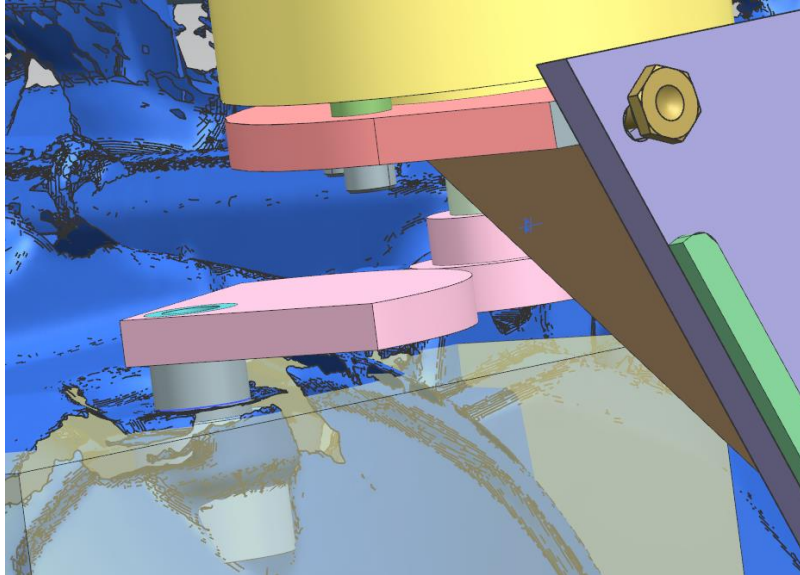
Clutch gear (left) is very large and attached to a Honda-made shaft.
